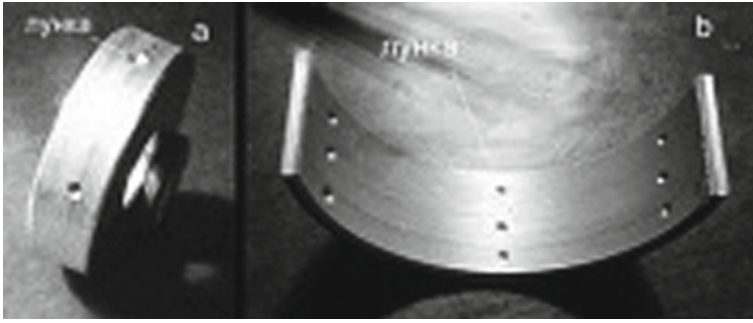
Examples of samples for measuring wear: a—disk, b—sliding bearing
